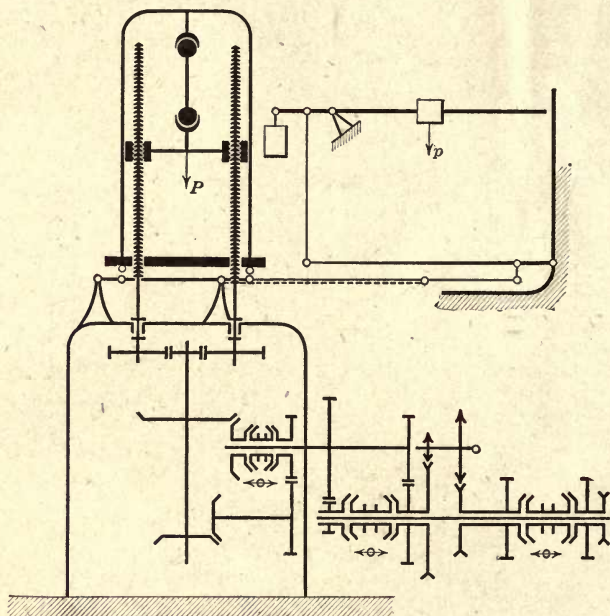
Diagrammatic view of a Riehle testing machine. (Modified from Marten's Handbook of Testing Materials.)
